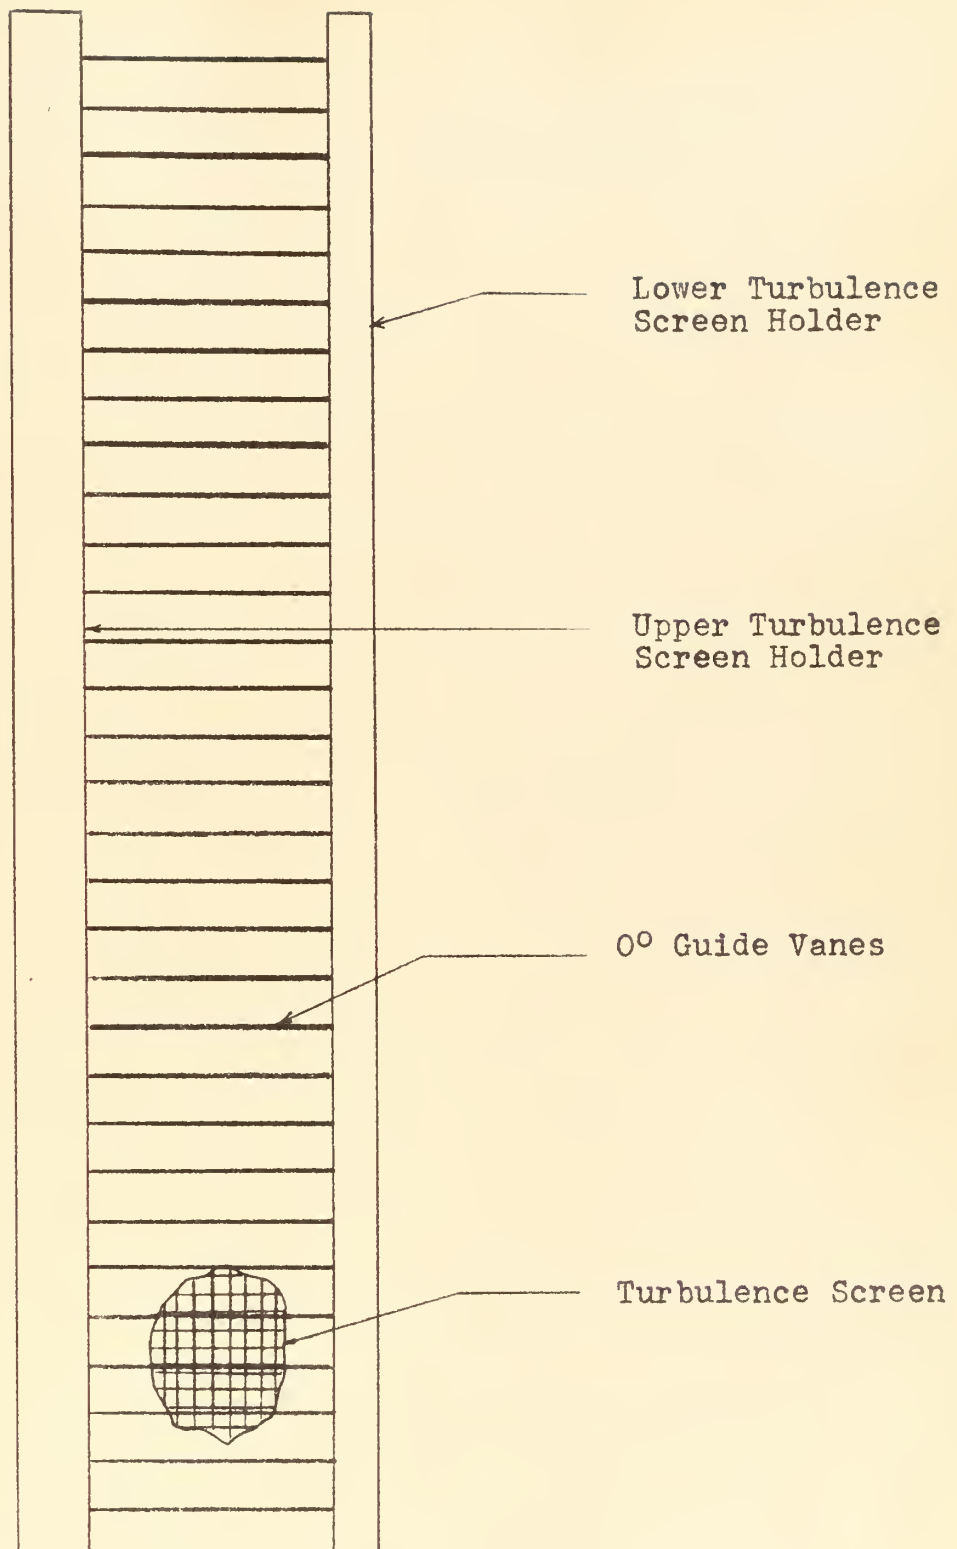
View B-B, Full Size, of Inlet Guide Vane Assembly.
